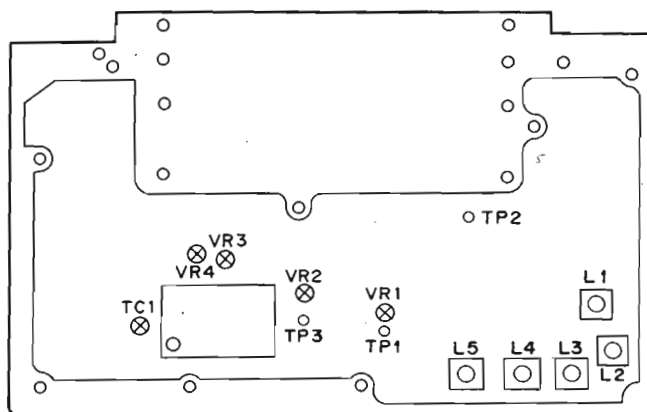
50 MHz BAND adjustment: Component layout (upper view)
